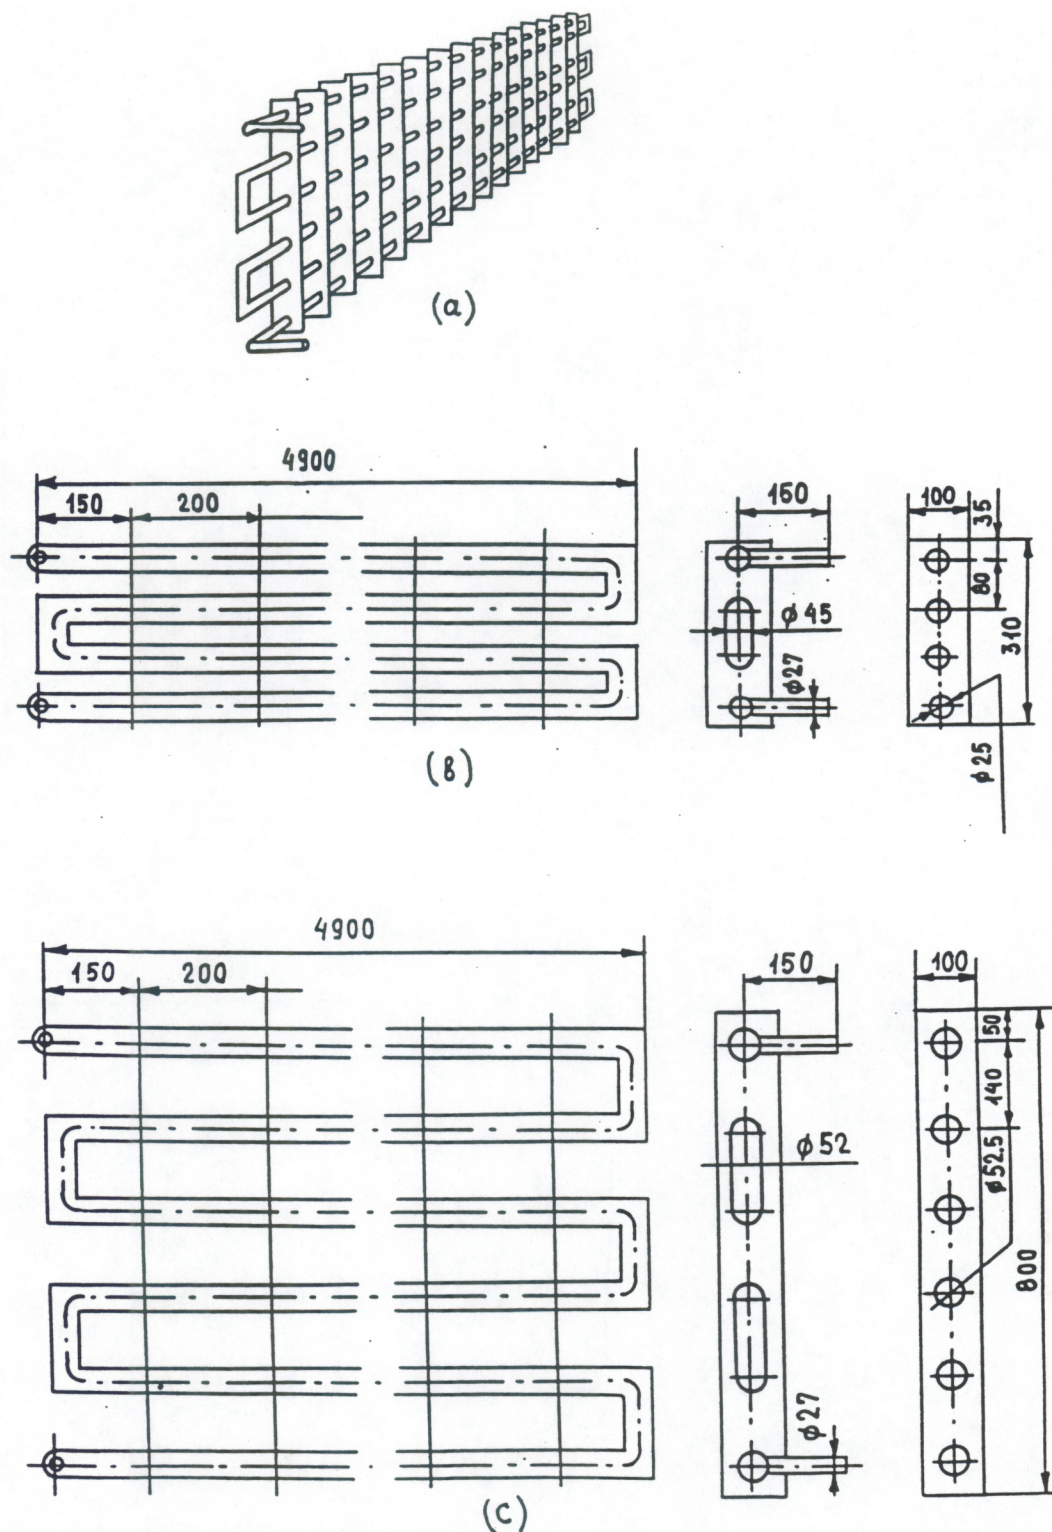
The heat exchanger construction (2nd design): (a) general view; (b) upper heat exchanger; (c) lower heat exchanger. Dimensions are in millimeters.
